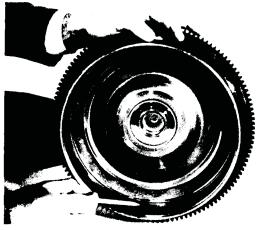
Welding "heat scars" show why ring gear replacement is not recommended.
